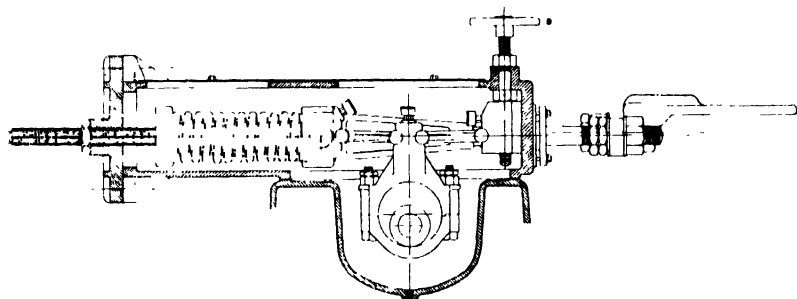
No. 15 Wilfley table : Head Mechanism.
